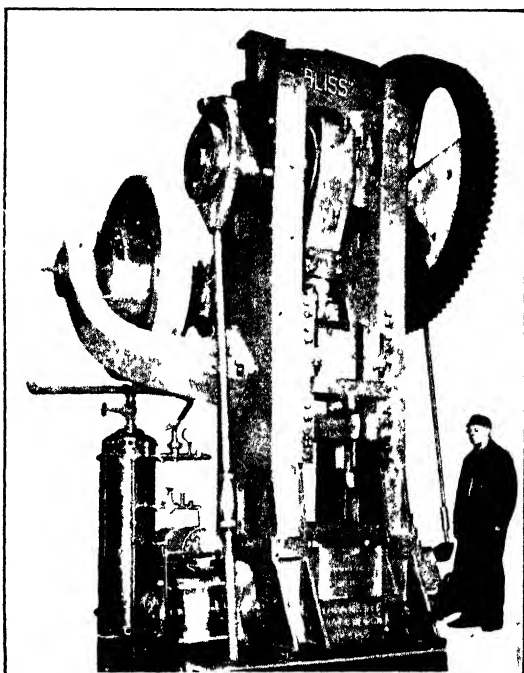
A heavy forging press with hydro-pneumatic relief cushion built into the bed. (*Marquette Tool & Mfg. Co.*)
